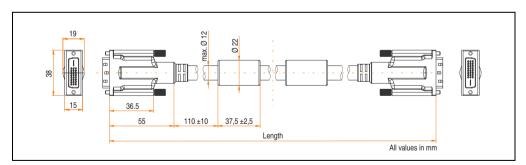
Dimensions - SDL cable 5CASDL.0xxx-03
